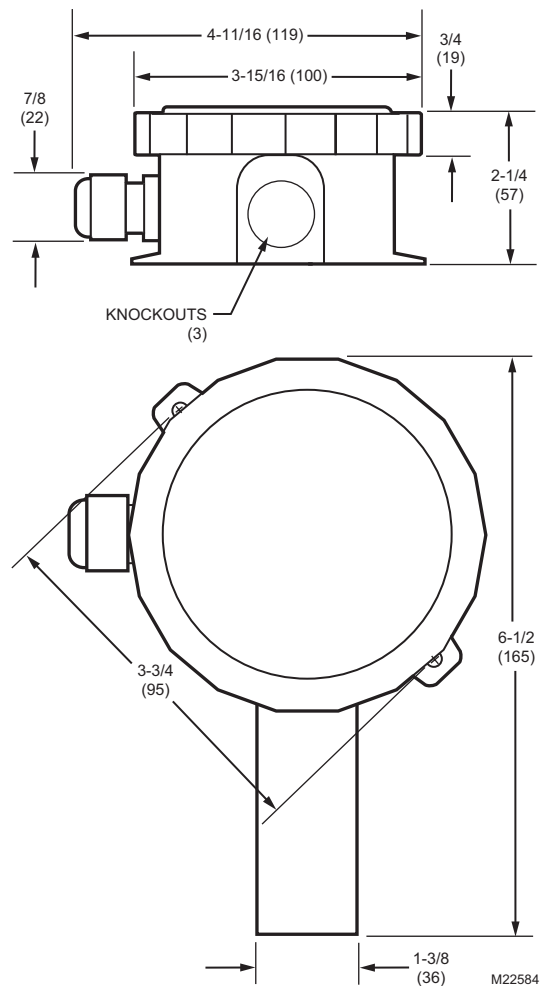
Outdoor-mount sensor dimensions in in. (mm).
